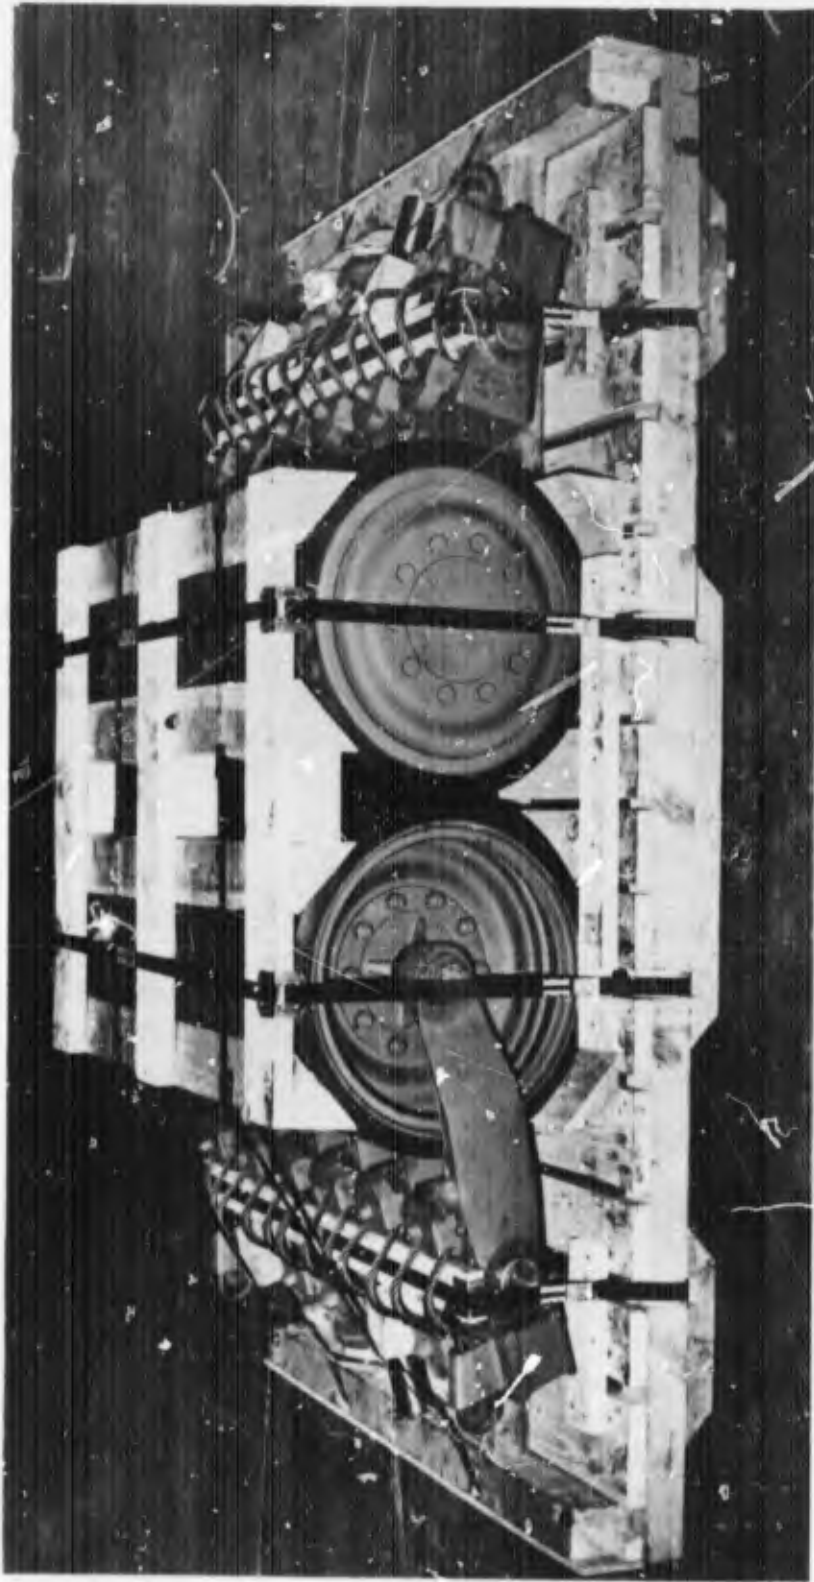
Wheel yoke (expendable components) assemblies ready for shipment.
